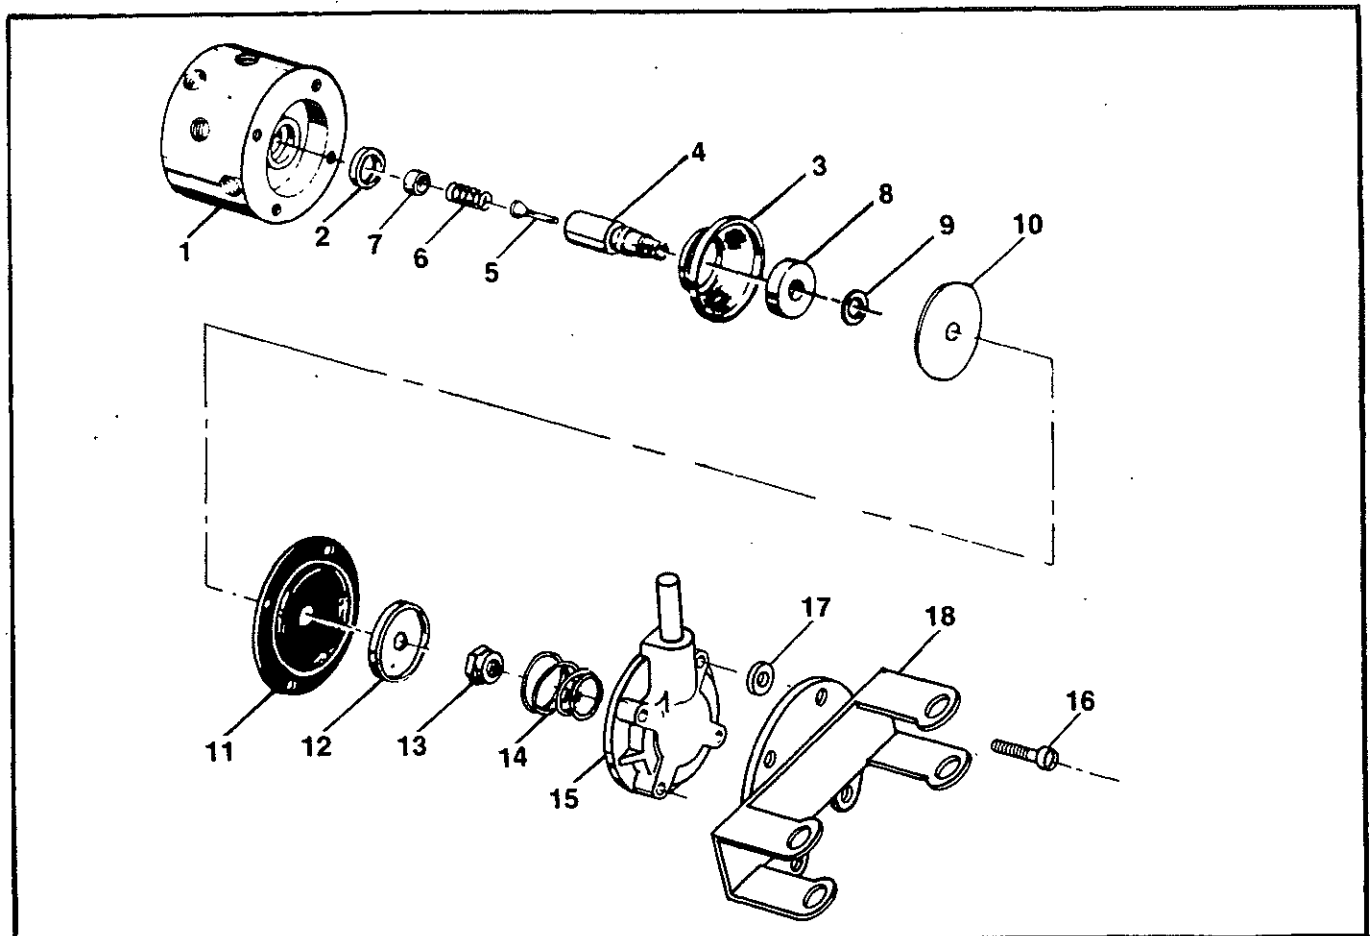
FUEL MANIFOLD VALVE ASSEMBLY.
